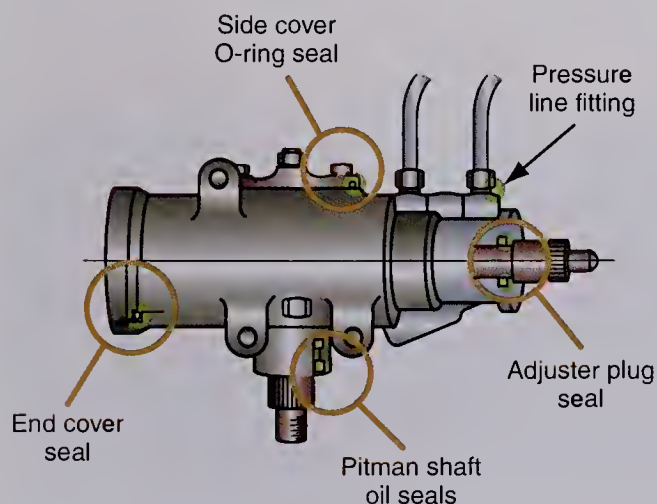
Power recirculating ball steering gear oil leak locations.
